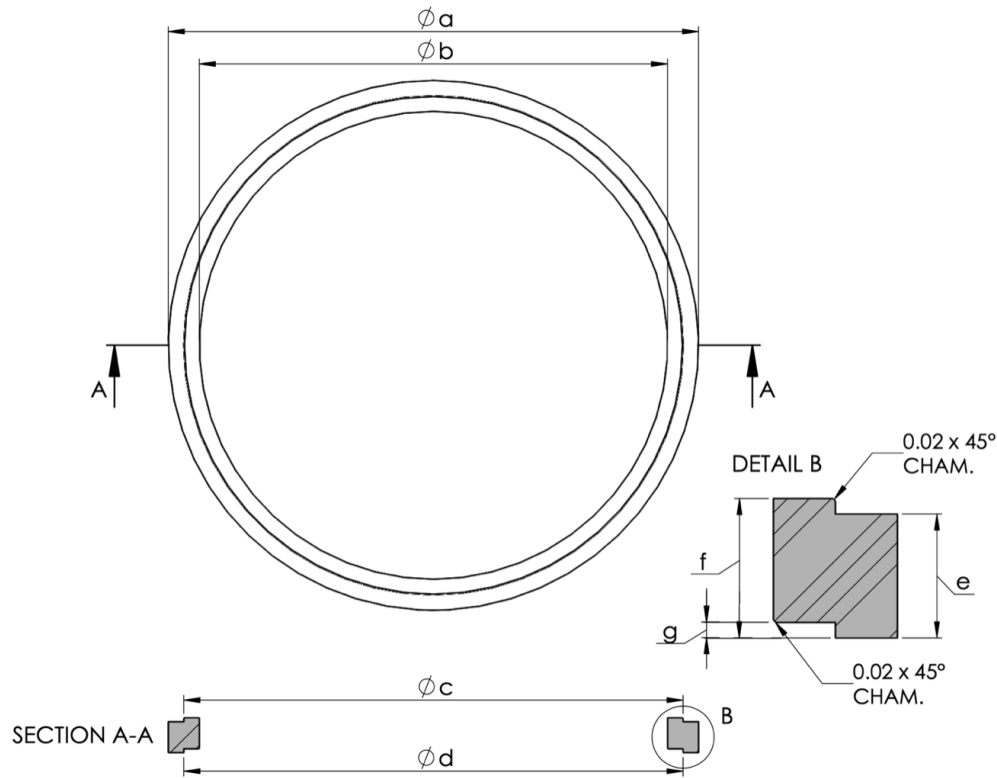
Drawing of the polyethylene reflector ring (in inches).
